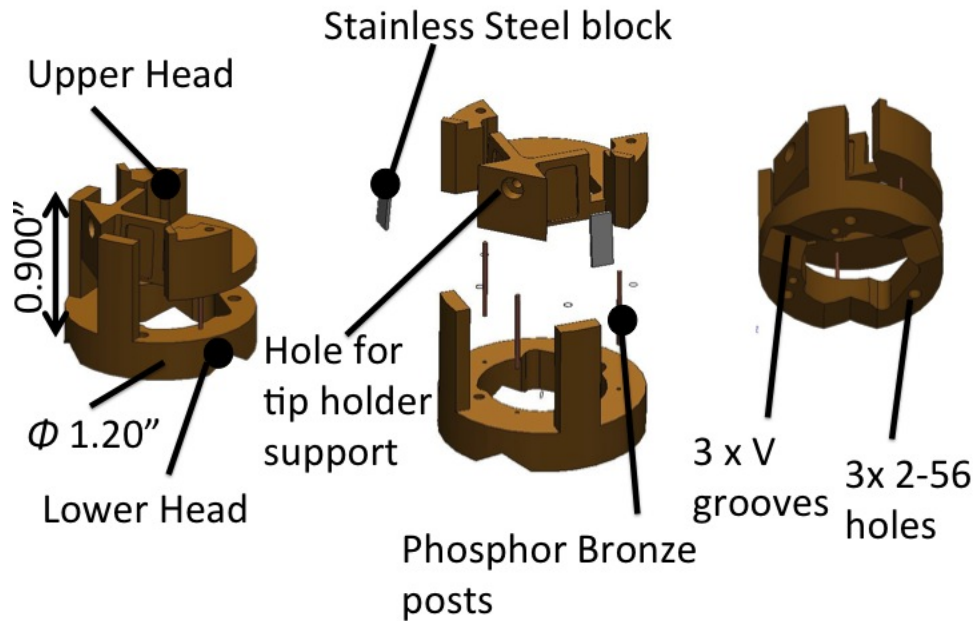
The left and right figures show the top and bottom views of lower and upper head while the center figure shows the exploded view of the upper and lower head. The head assembly is 0.9 inches tall and has circular width with a diameter of 0.12 inches. The upper head and lower head are attached to each other via the three phosphor bronze posts. There are three V grooves on the bottom side of the lower head such that it can be positioned on top of three screws coming from the cage assembly. There are three 2-56 threaded holes for screw hooks for spring attachment onto the cage. Solidworks File: newhead.1.sldasm
